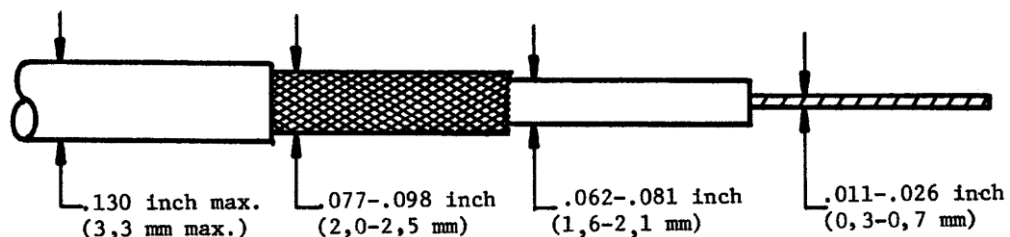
COAXIAL CABLE DIMENSIONS FOR D-602-0094 AND D-602-0095 CONTACTS
